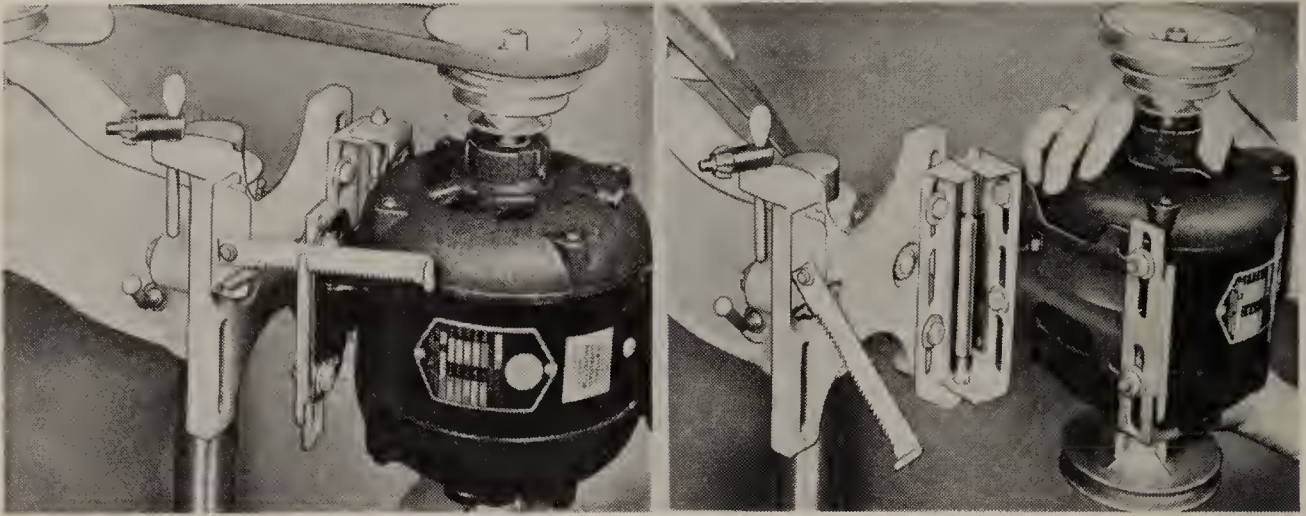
Attachment of motor to drill press. To remove motor, merely lift belt-tension ratchet to release position and slip V-belt off pulley. Then grasp motor in right hand with fingers extended to safety catch spring release for removal of motor from the tool.
